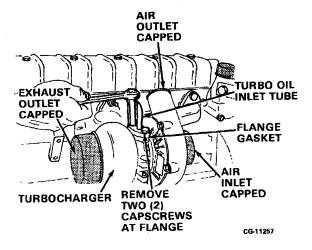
Removing Capscrews from Turbocharger Oil Inlet Tube Flange
